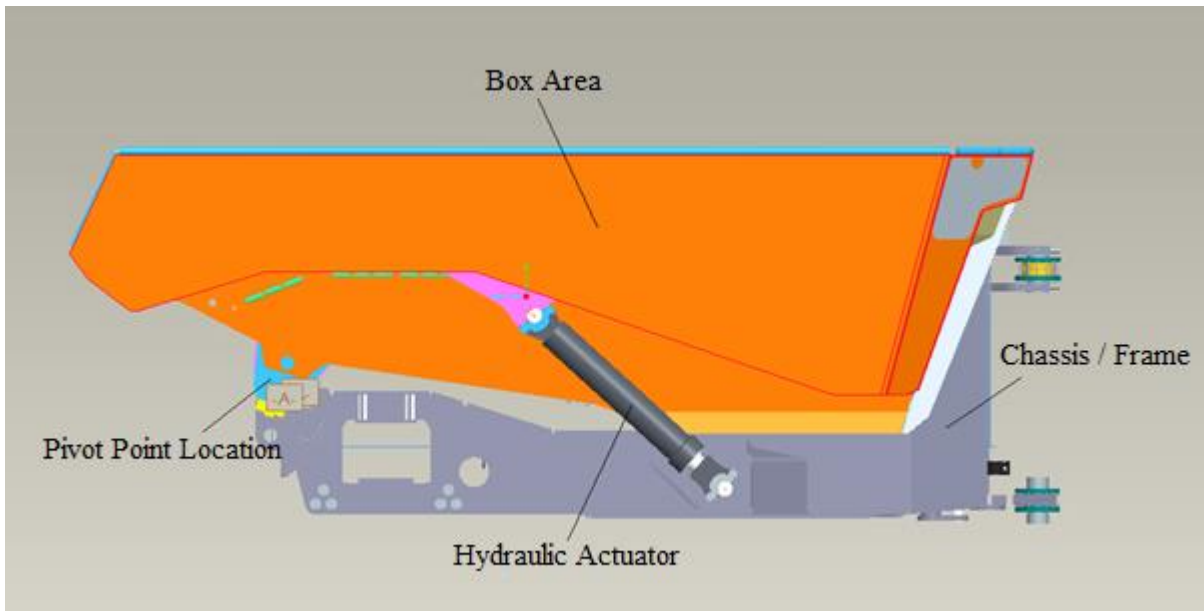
A side view of the Standard box configurations, mounted on the rear Chassis / Frame assembly
